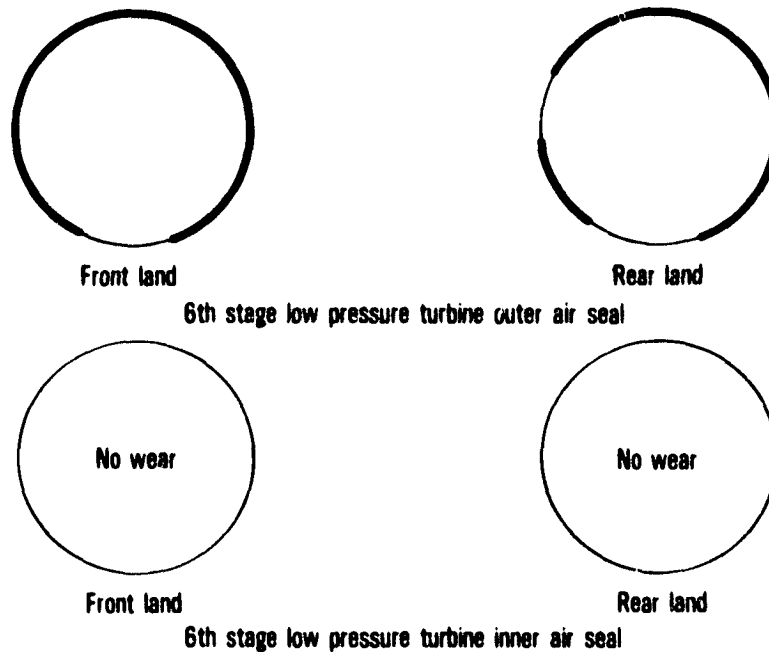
Teardown Wear Patterns (Rear View); Sixth-Stage Low-Pressure Turbine Outer and Inner Air Seals. (J23976-21)
